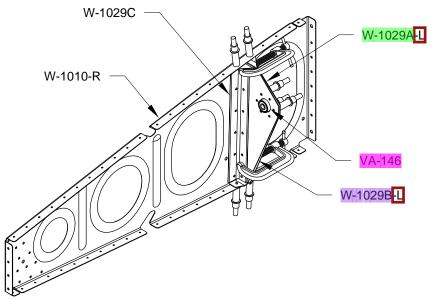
MATCH-DRILLING W-1029C ANGLE
